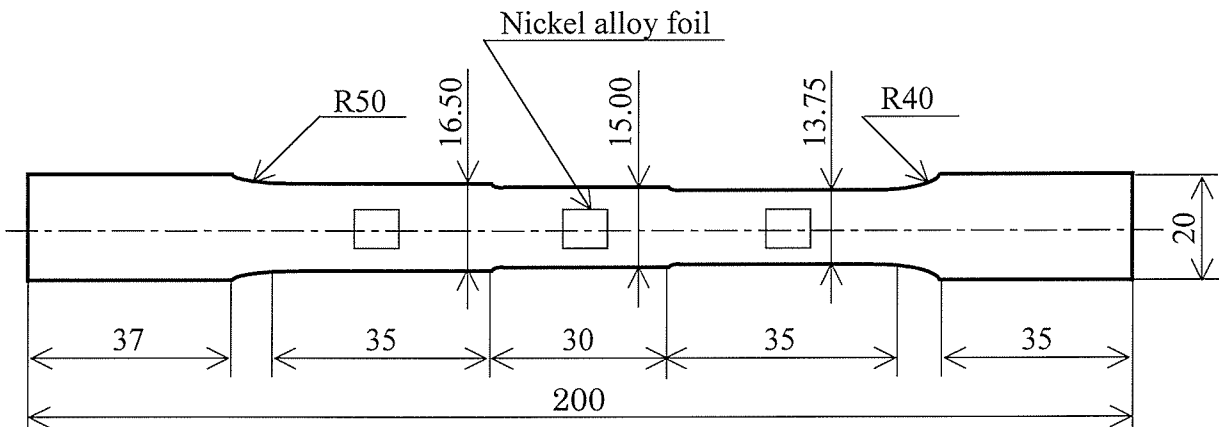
Geometry and dimensions of specimen for pulsating tension test
